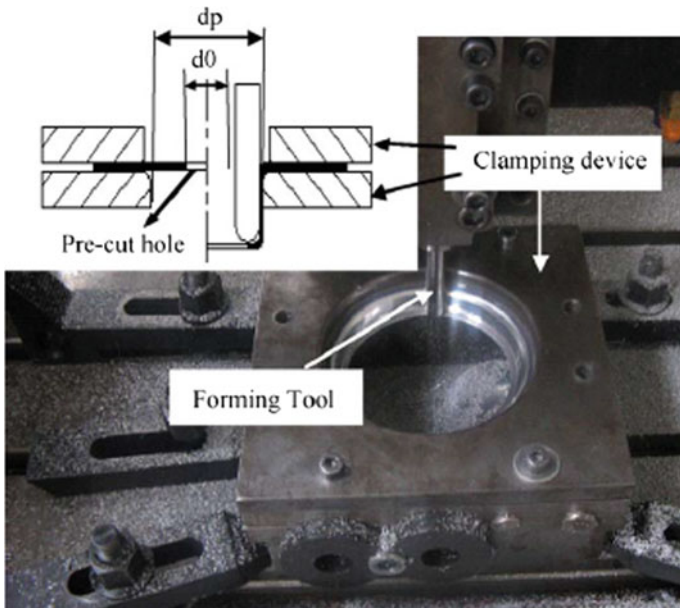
Experimental setup of single incremental forming on tabletop of CNC machine for formation of flanges [1]
